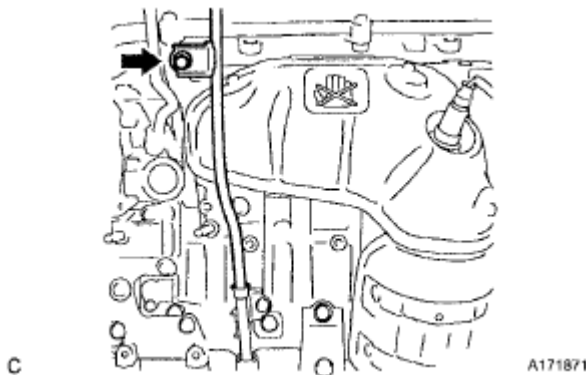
Locating No. 2 Engine Oil Level Dipstick Guide And Bolt
